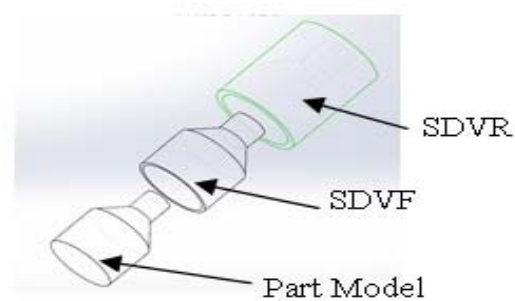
Exploded view of assembly of SDVR, SDVF and part model.
